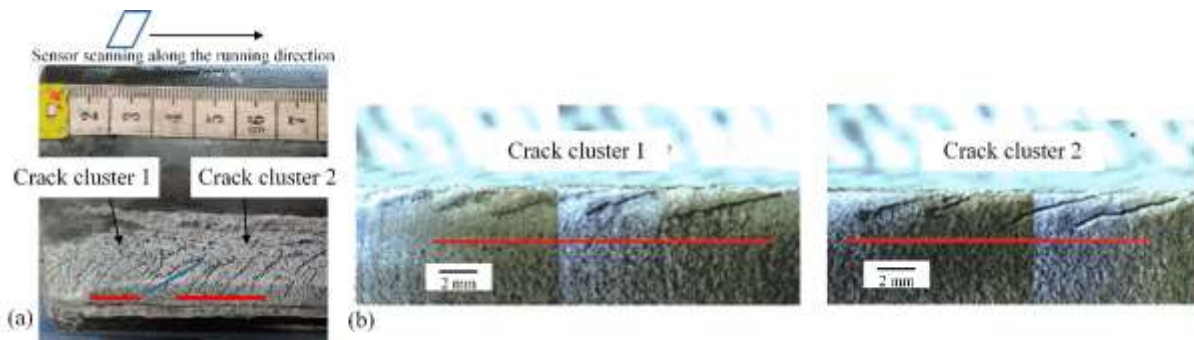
(a) The crack cluster inspected through ACFM grid scanning; (b) sectioned rail (sectioned along the running direction approximately at the mid-crack surface length position) showing the sub-surface crack length.
